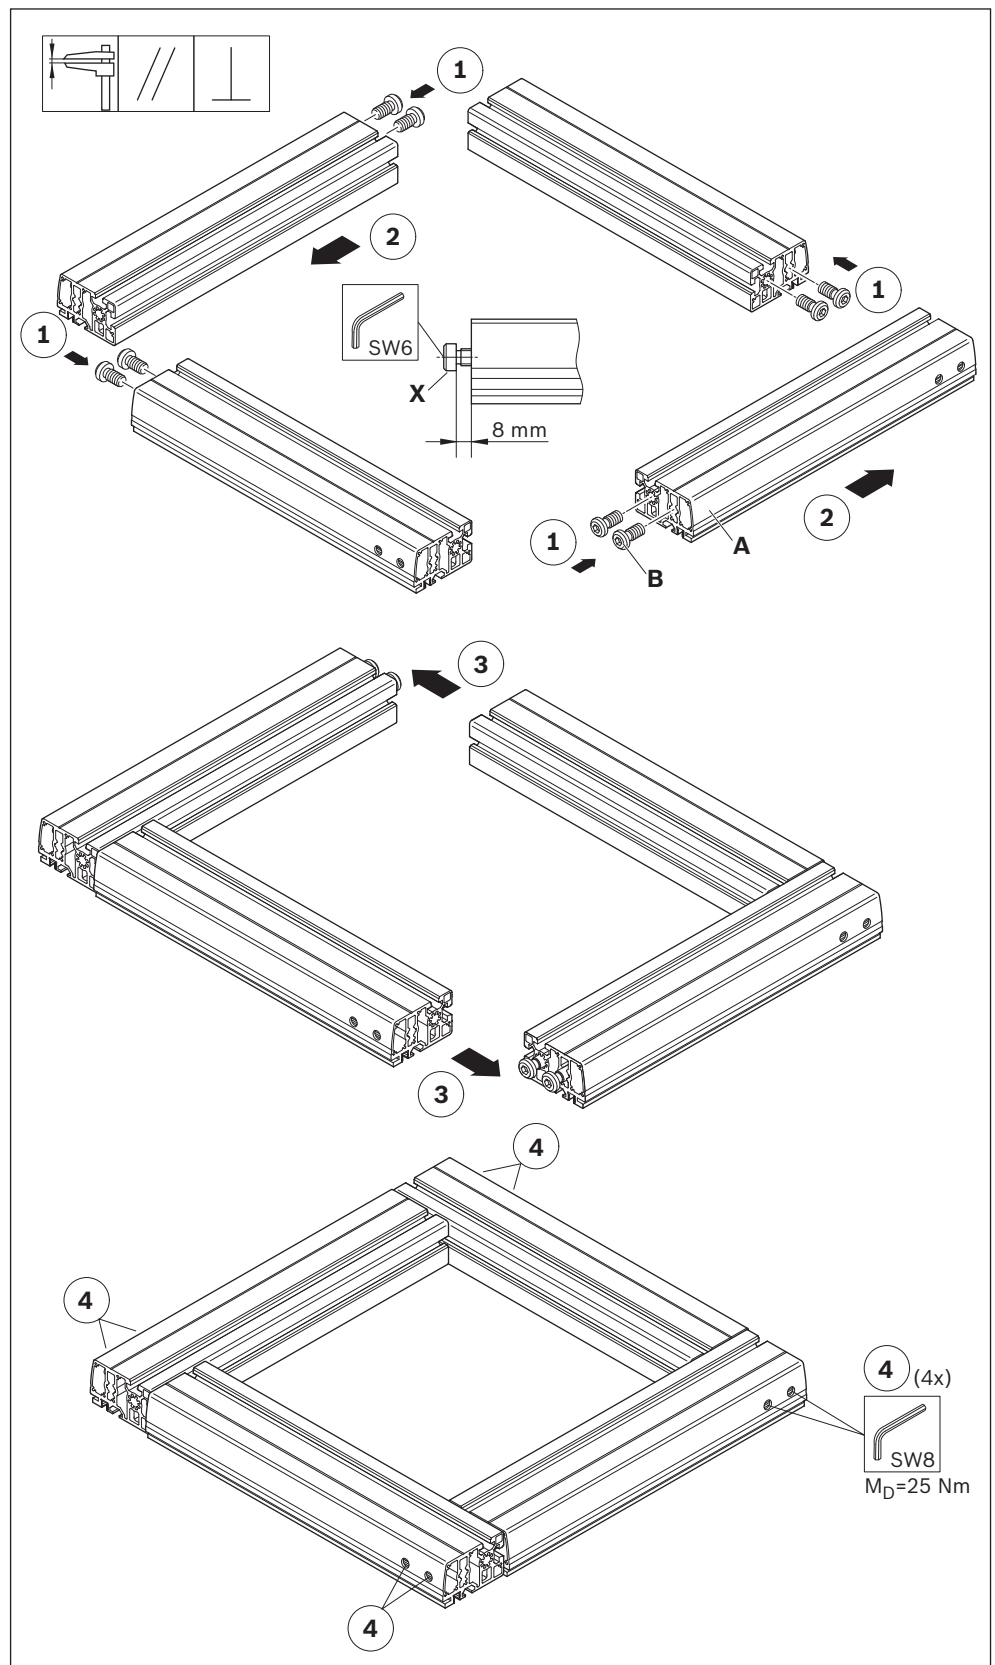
Assemble workpiece pallet WT 2/F-H (1/2)
